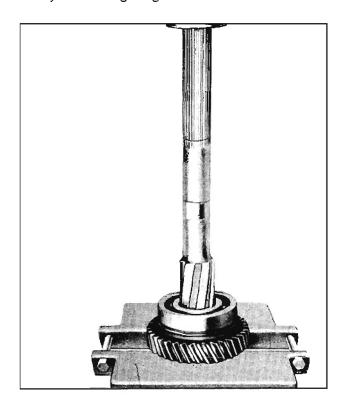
Removing Mainshaft from Rear Bearing ond First Speed Gear
